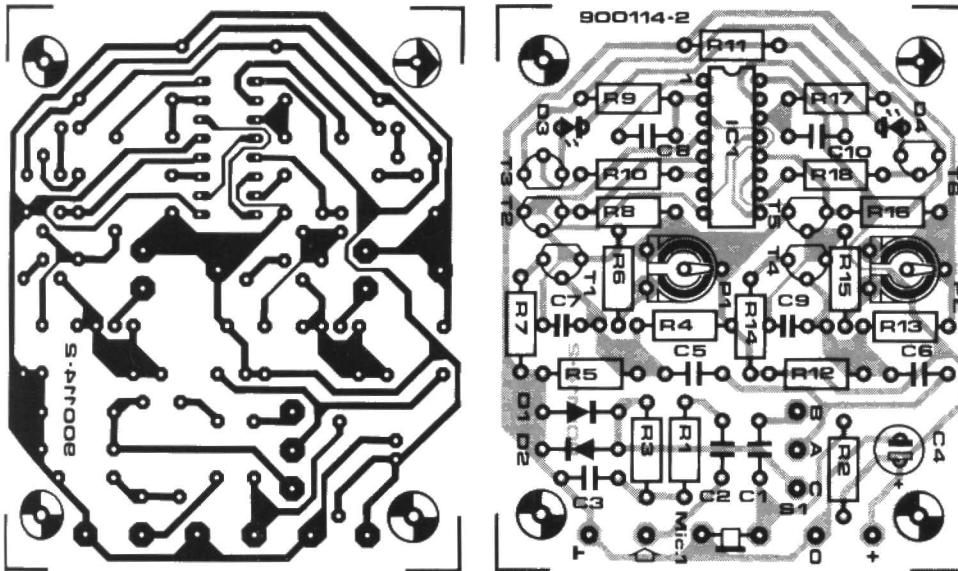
Single-sided printed-circuit board for the pulse receiver.
